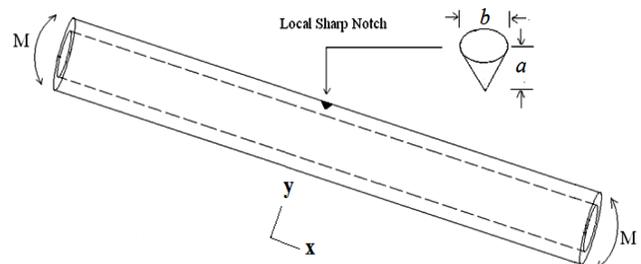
A schematic drawing of a local sharp-notched tube with a notch depth of a .
